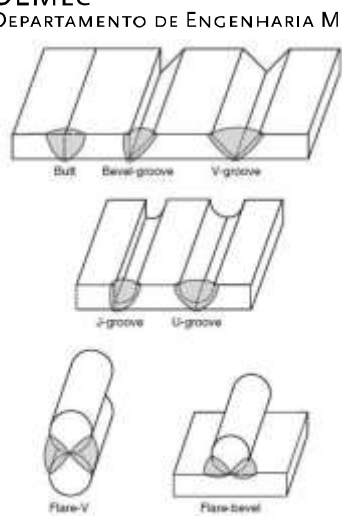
Types of welds that may be made with a basic butt joint
